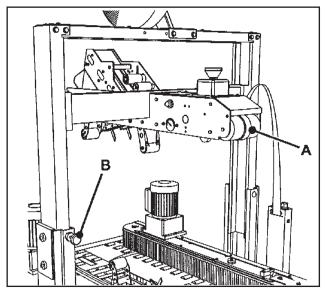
Latching Knob, Upper Taping Head Frame
